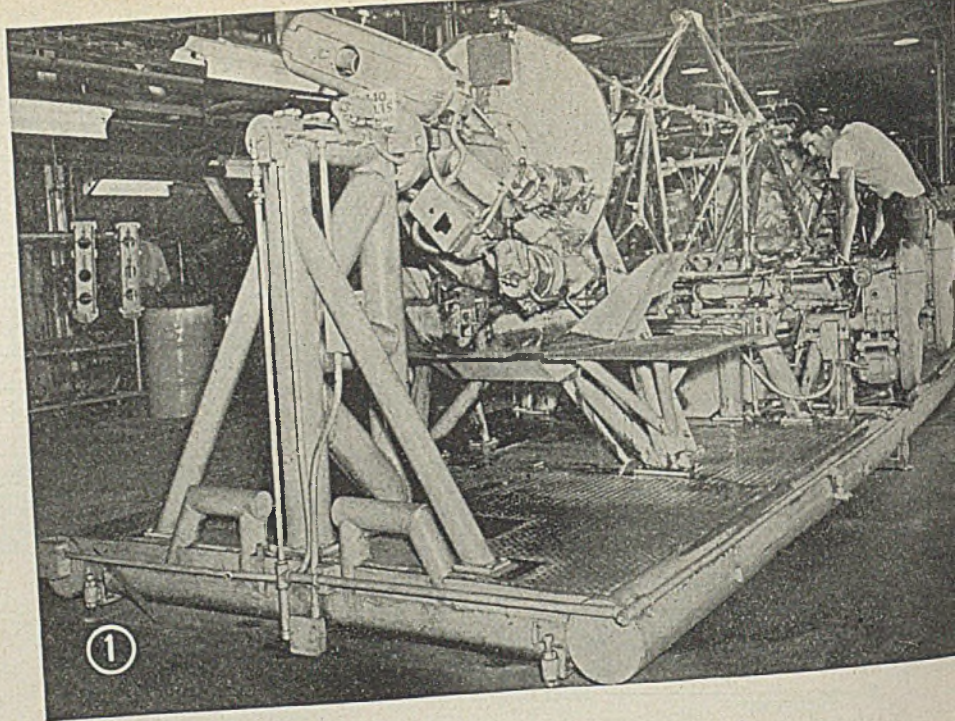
General view of the master drill jig with a fuselage in position and the side turrets drilling two wing fittings on each side of the frame
